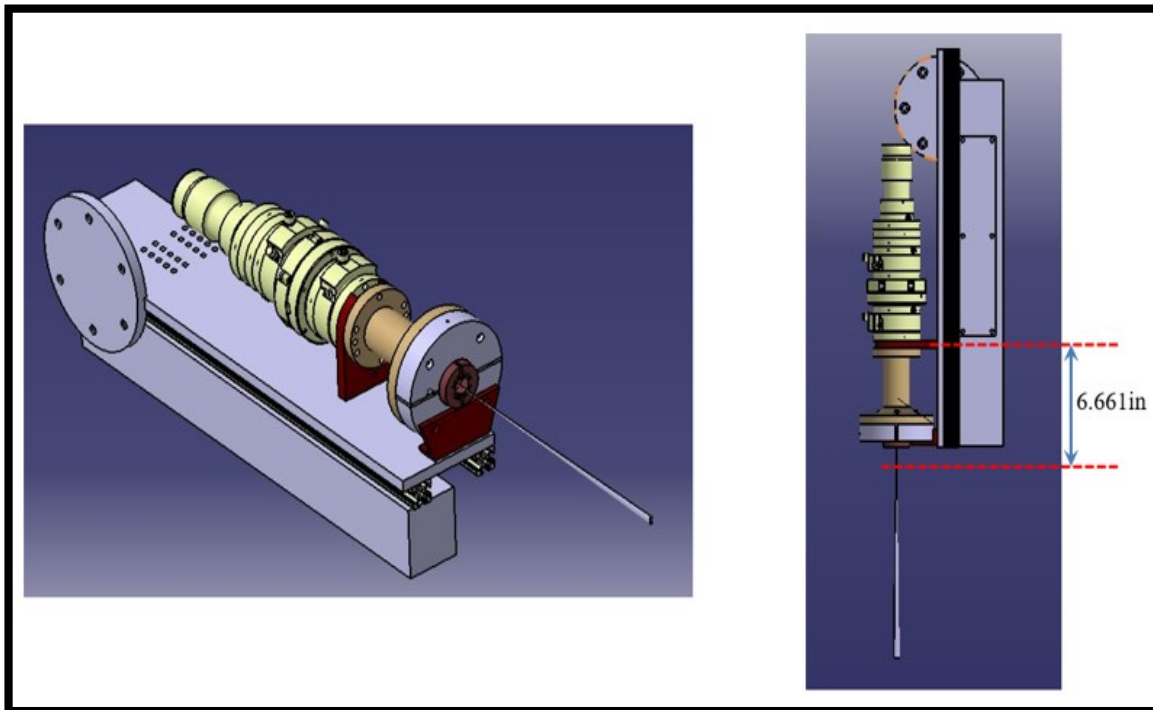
CAD assembly of the ISLM System setup on robot arm with simulated laser beam travel
